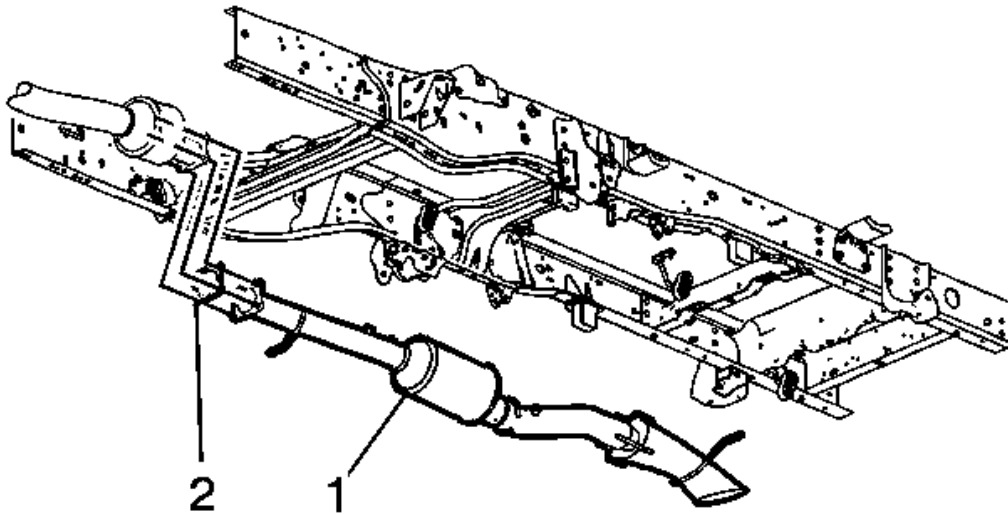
View Of Exhaust Particulate Filter & Gasket
